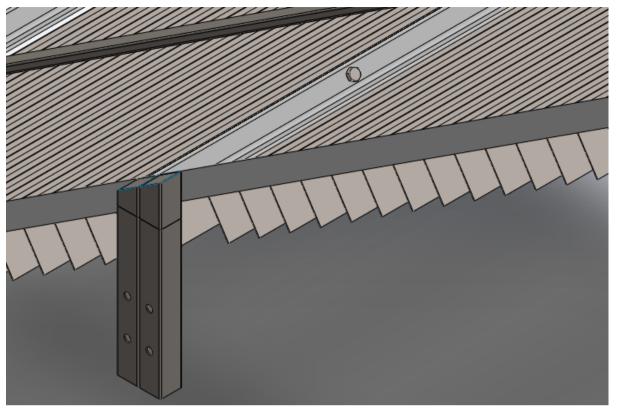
Isometric view of one of the M8 x 20 bolts fixing both top modules
